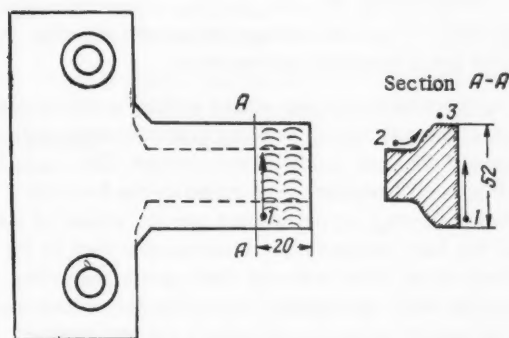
Method of welding-on of the cutting part of the punch.
